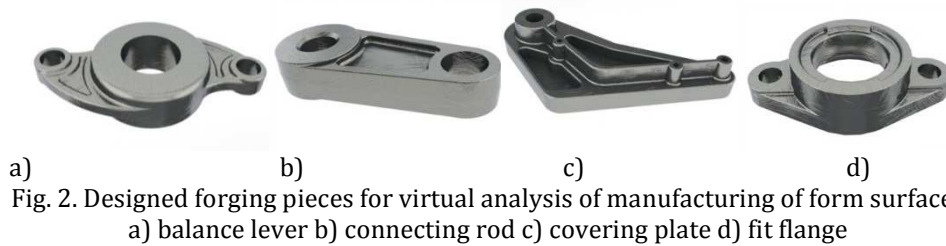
Designed forging pieces for virtual analysis of manufacturing of form surfaces
